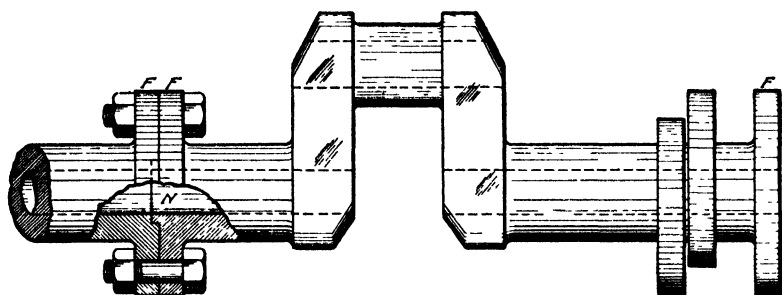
Portion of Marine Engine Crank Showing Method of Bolting Sections Together
